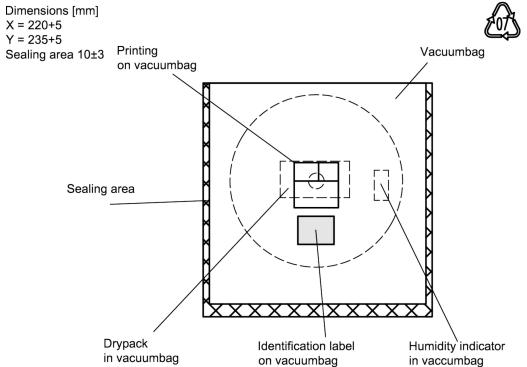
Drawing of moisture barrier bag (MBB) for reel with diameter of 180 mm.
